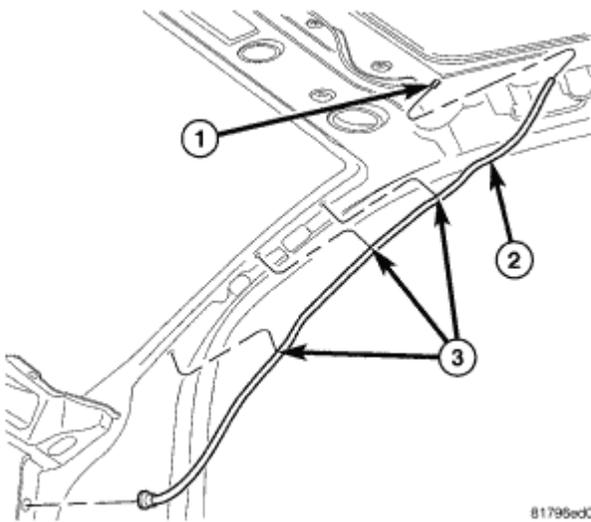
Sunroof Assembly, Front Hose & Support Clips
